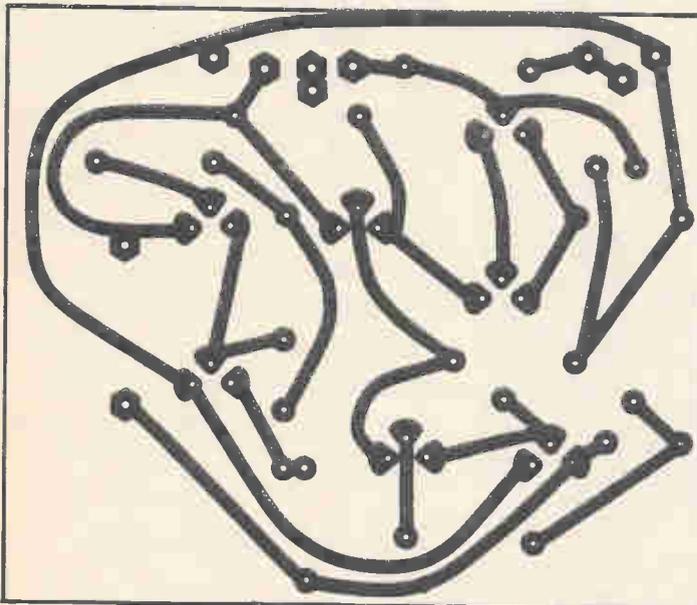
The foil pattern is provided here, full sized, for those readers who wish to etch their own circuit boards.
